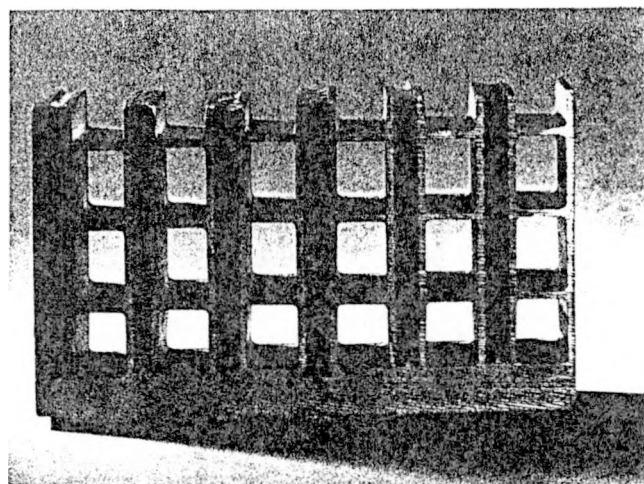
Elemental Section of the Compact Heat Exchanger Showing Extruded Water Flow Channels
